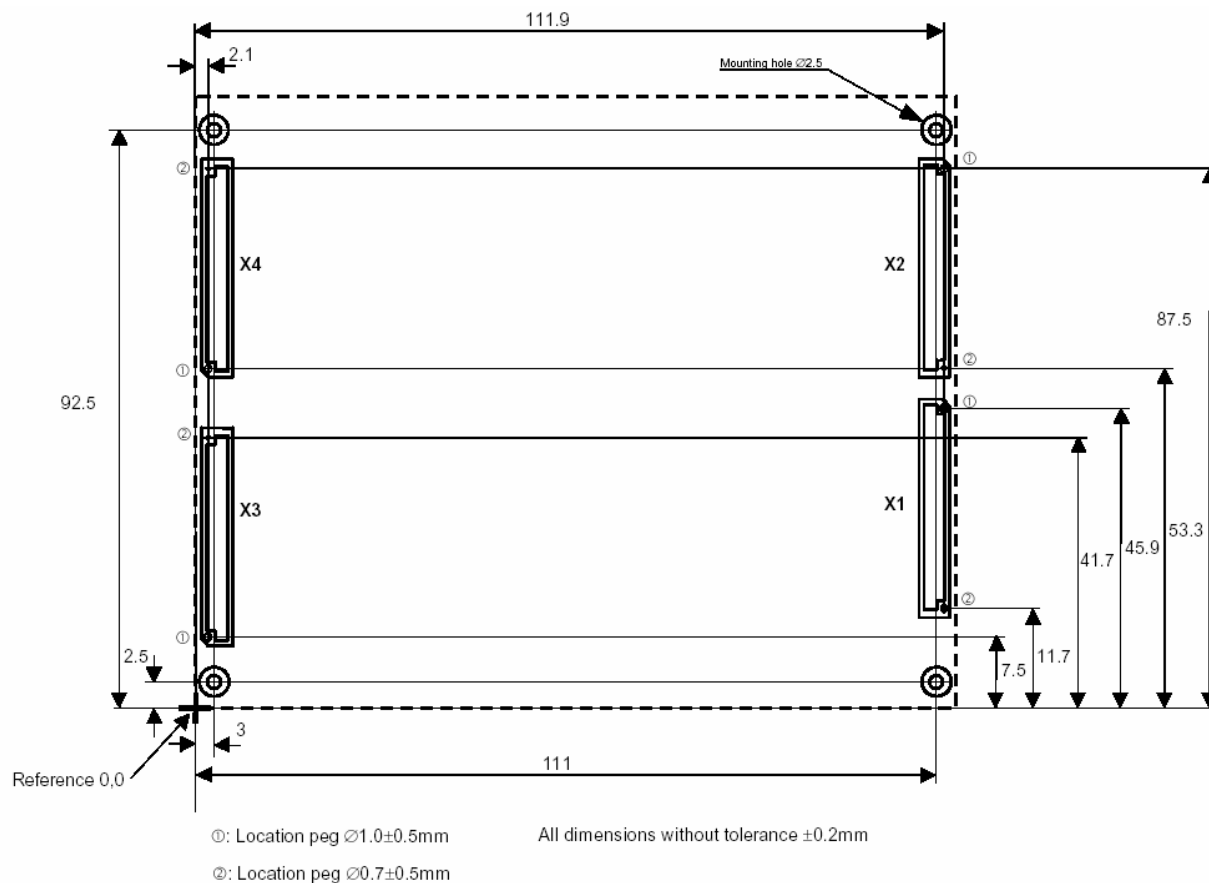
Fire Engine Mating ETX Footprint Mechanical Drawing
